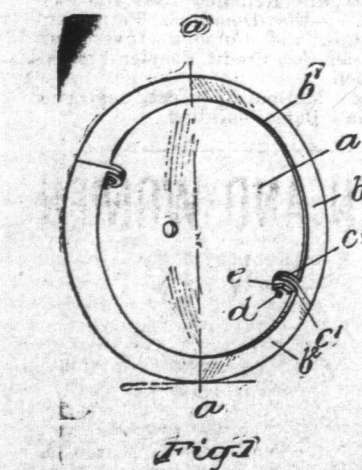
A sub-surface packer showing a V-shaped rim attached to a disc harrow blade.
